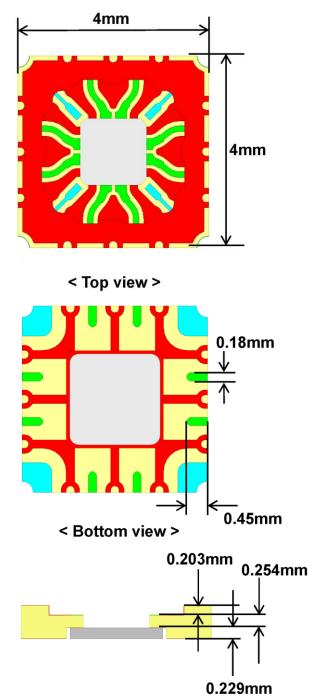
CQFN 24-Pin Package Drawing (All Dimensions in mm)
